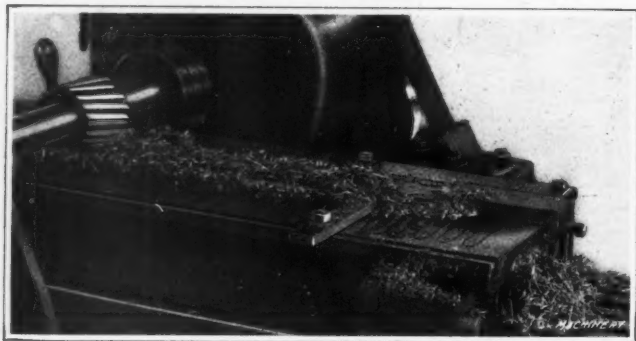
Horizontal Milling Operation performed with Aid of Magnetic Chuck
